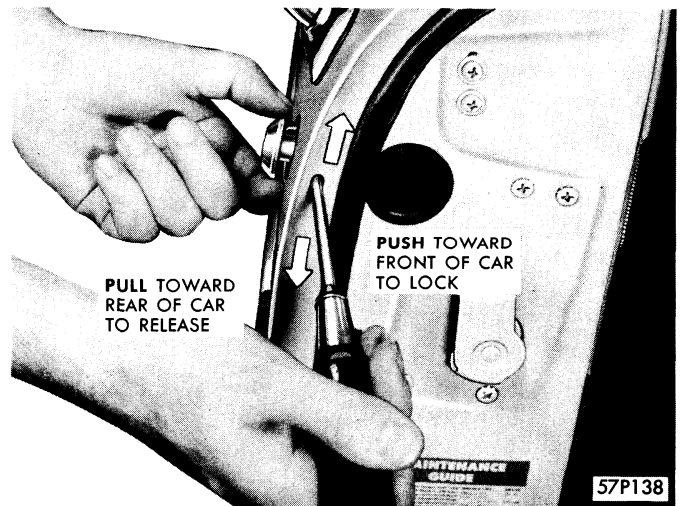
Sliding Latch Plate To Remove or Install Lock Cylinder
